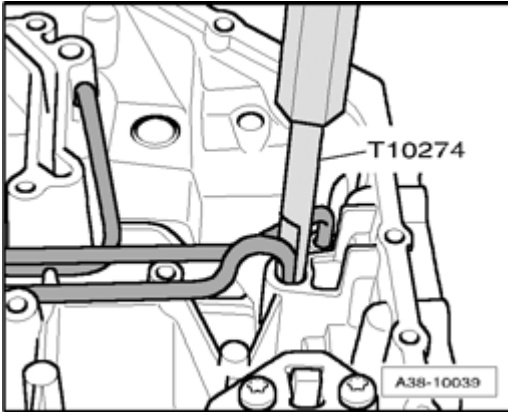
Drive ATF Oil Tubes Into Transmission Housing With Light And Careful Taps, Alternating Between Sides, Using Drive-In Tool T10274
